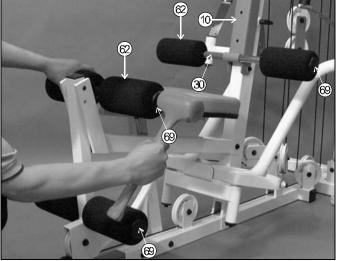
Next, insert one Foot Roll Plastic End Cap 1" (#69) to each end of the three tubes as shown above. Refer to the Exploded View Diagram on page 26 for further clarification of this assembly.
